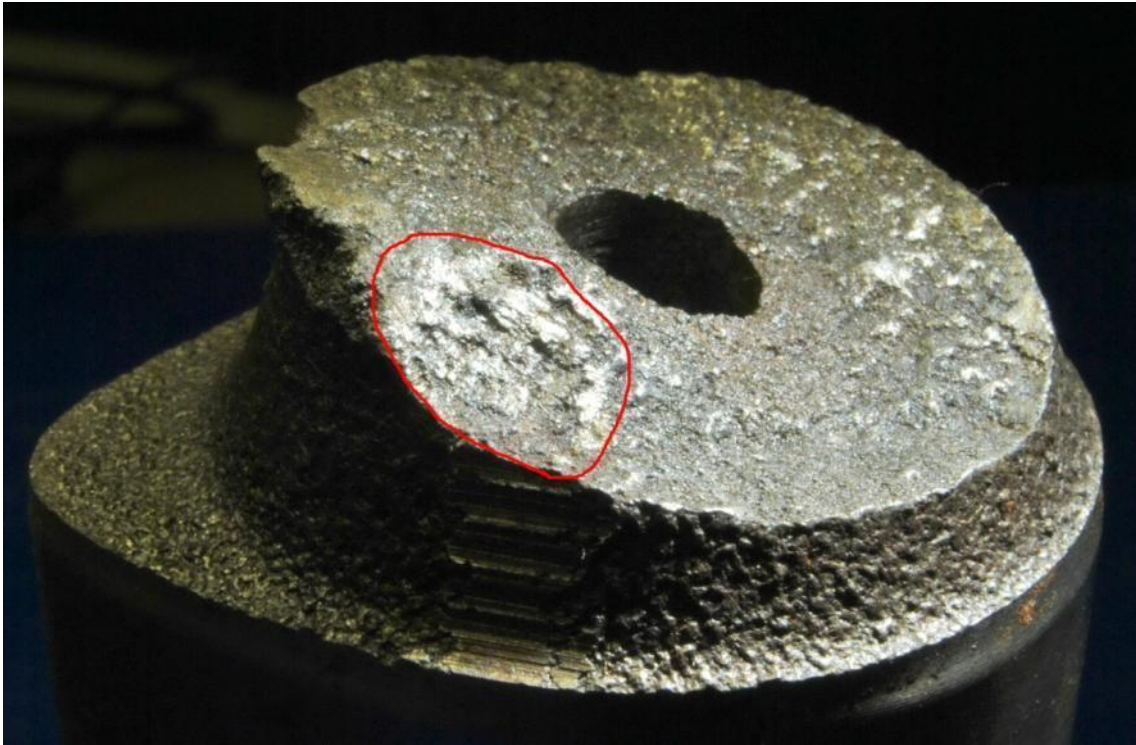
Failed camshaft from the Callagher engine. The crack initiation area is marked.
